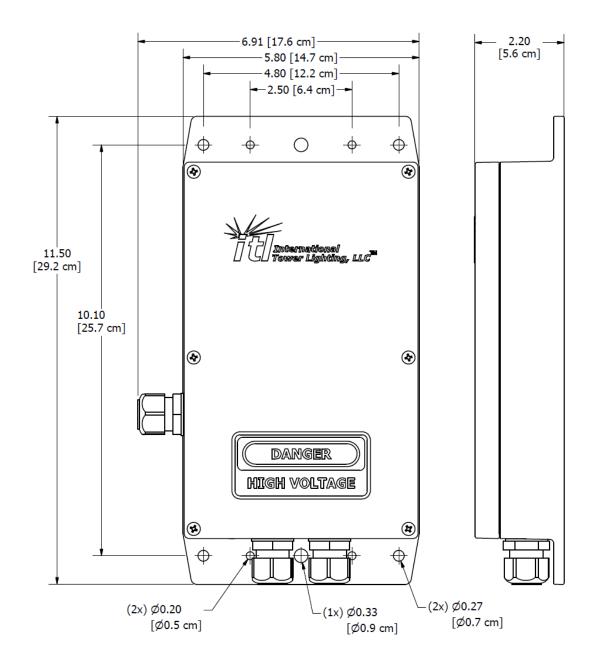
SUP-2670-000 Surge Suppressor Dimensions and Mounting Details
